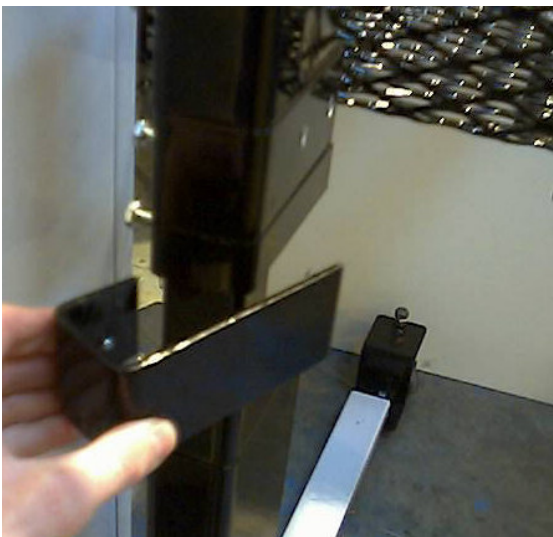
REMOVE ANY UNNECESSARY SPACERS
